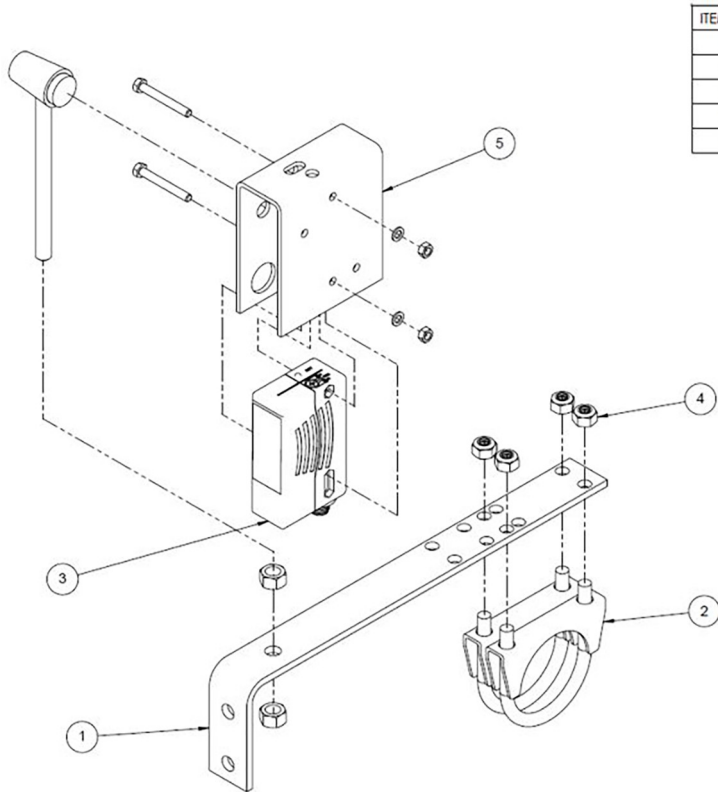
Single Girder Hoist Reflector Mounting
